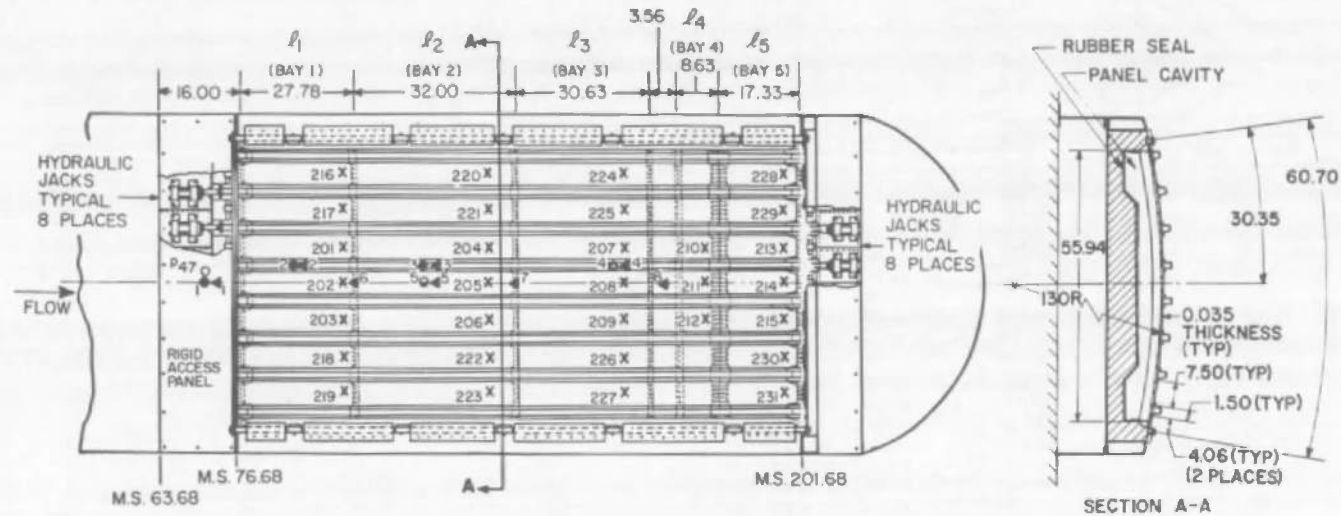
Details of Test Fixture with Flutter Panel Installed
